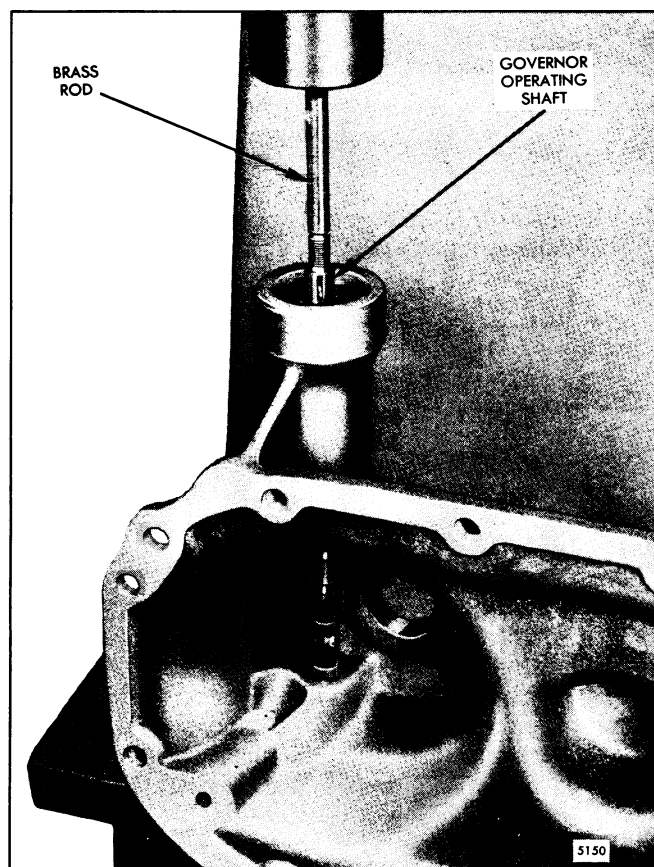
Removing Operating Shaft from Weight Housing Upper Bearing
